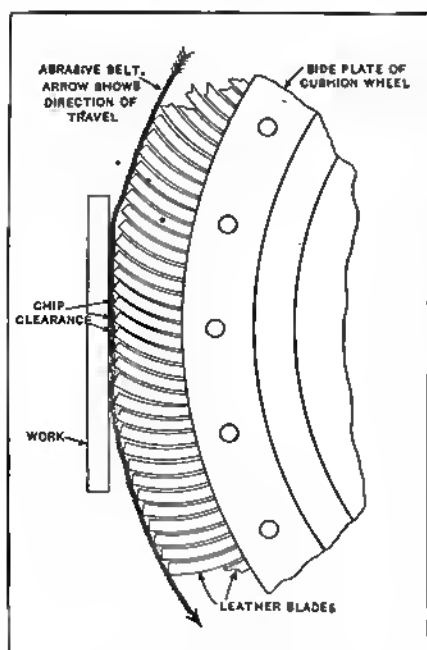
Principle of Supporting Wheel on Machine shown in Fig. 7.
